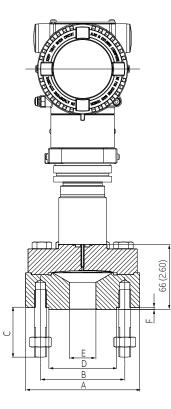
266HRH / 266NRH with barrel housing and direct mount seal S26Mx off-line flanged (For dimensions of S26 seals refer to the S26 datasheet)
